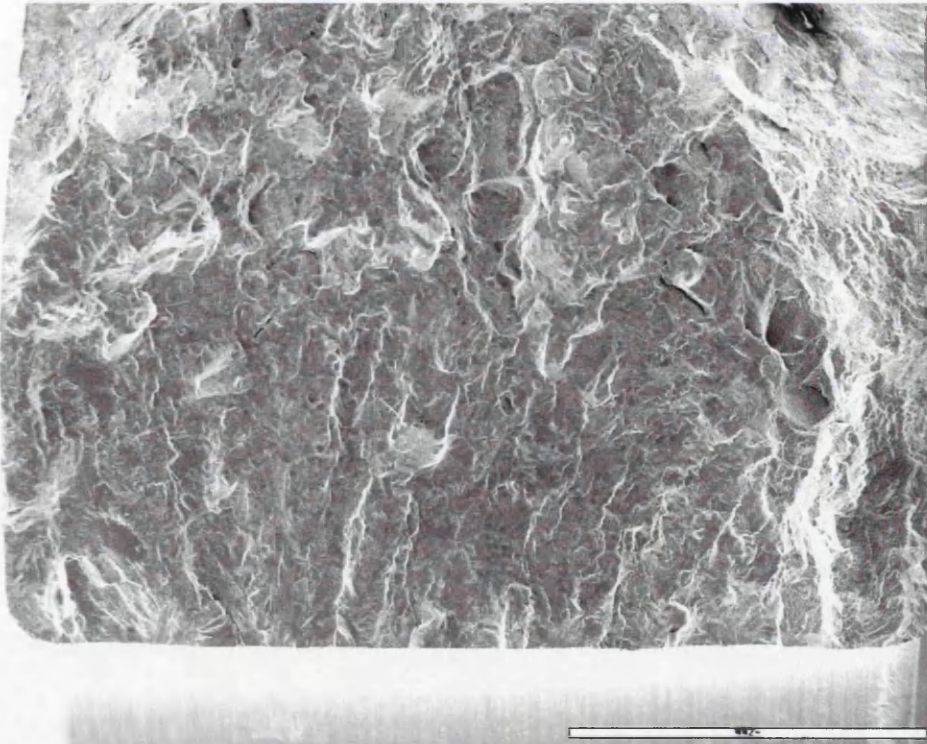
Strain control fracture surface (450°C, 2 min dwell in tension), with fracture originating from surface.
